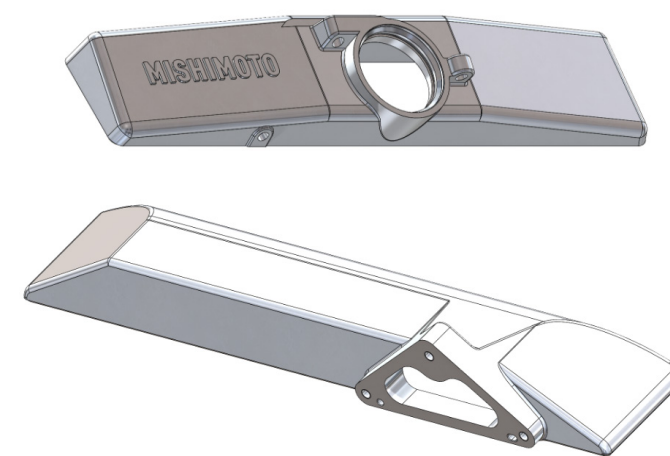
Mishimoto top mount intercooler with Mishimoto intercooler shroud
